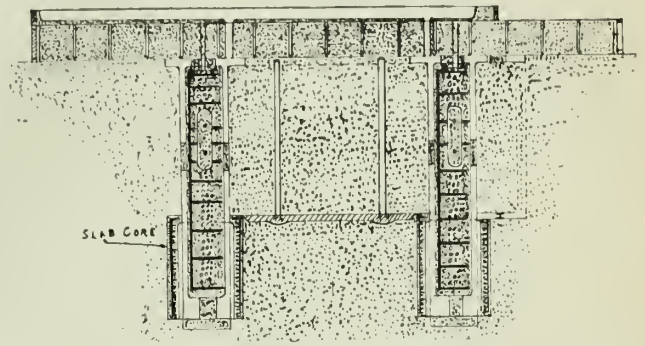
SECTION VIEW OF MOULD SHOWING MAIN BEARING CORES AND CENTER LIFTING-PLATE.
